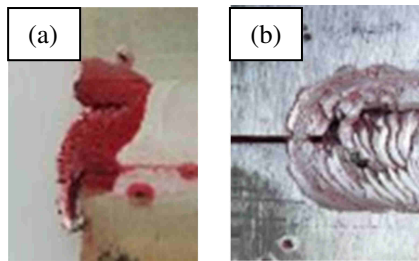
Photographic images of (a) Edge entry and (b) Guided hole entry.
